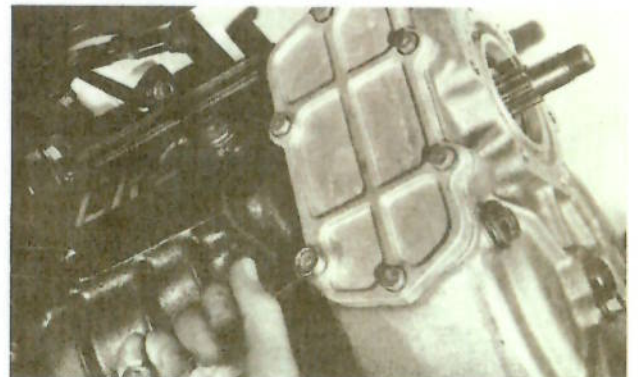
REMOVING THE POWER TAKE-OFF COVER FROM THE TRANSFER CASE.
